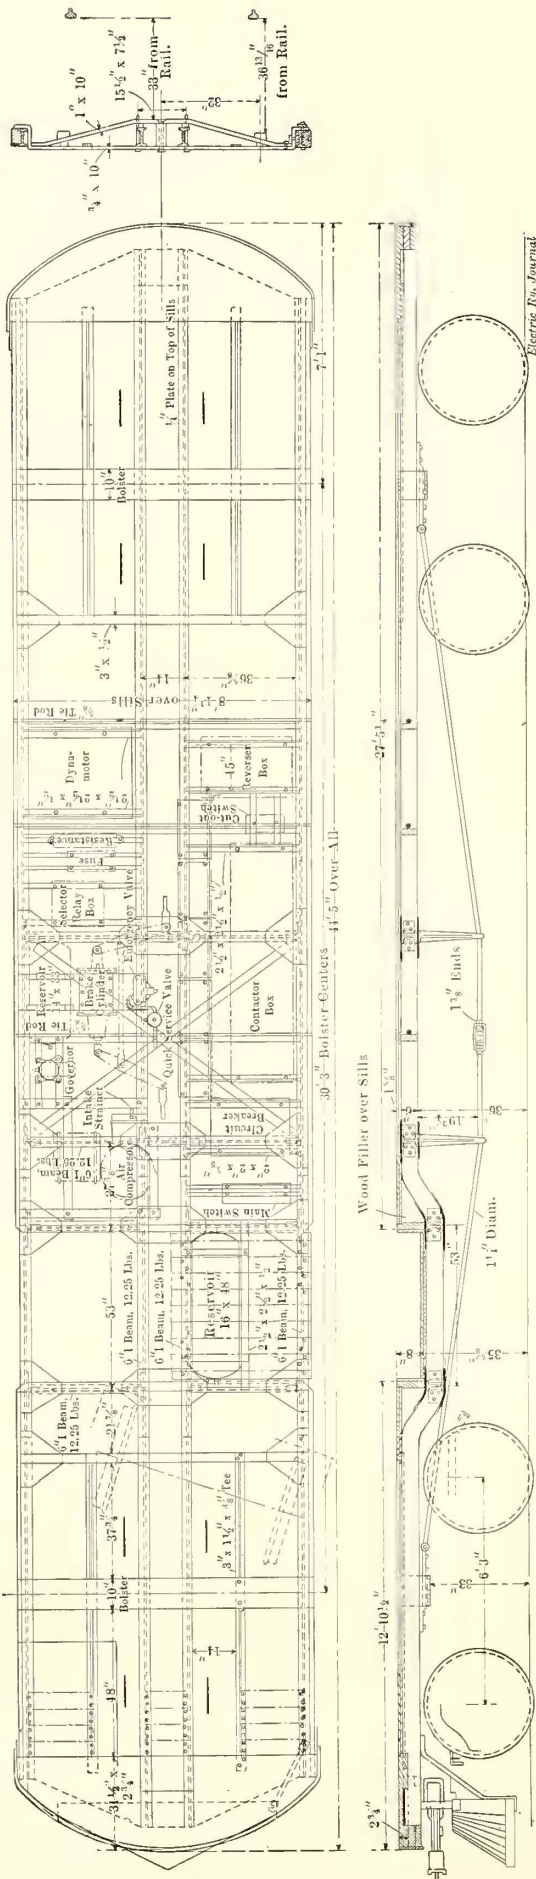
Shore Line Railway—Plan and Side Elevation of Floor Framing, Showing Bent Sill for Side Entrance and Location of 1200-Volt Equipment
